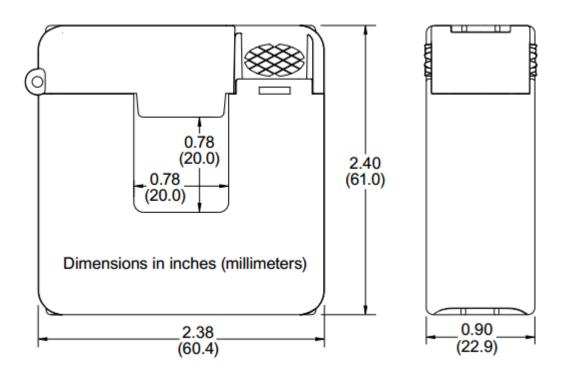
Magnelab CT dimensions between 0.75 "and 2.00"
